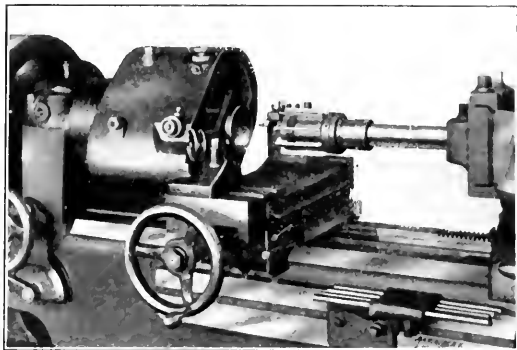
Chuck and Tools for Gas Engine Cylinders.
